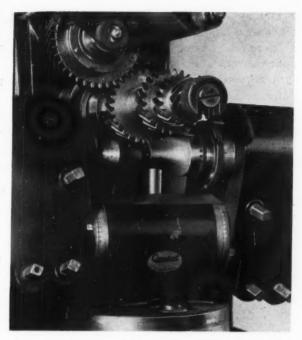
Using fly cutters, this machine rapidly removes burrs from both sides of gear teeth
